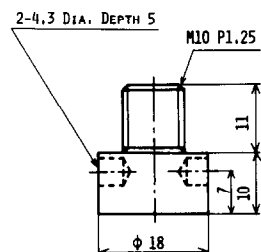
Shape and dimensions of the disc (all dimensions are in millimeters).
